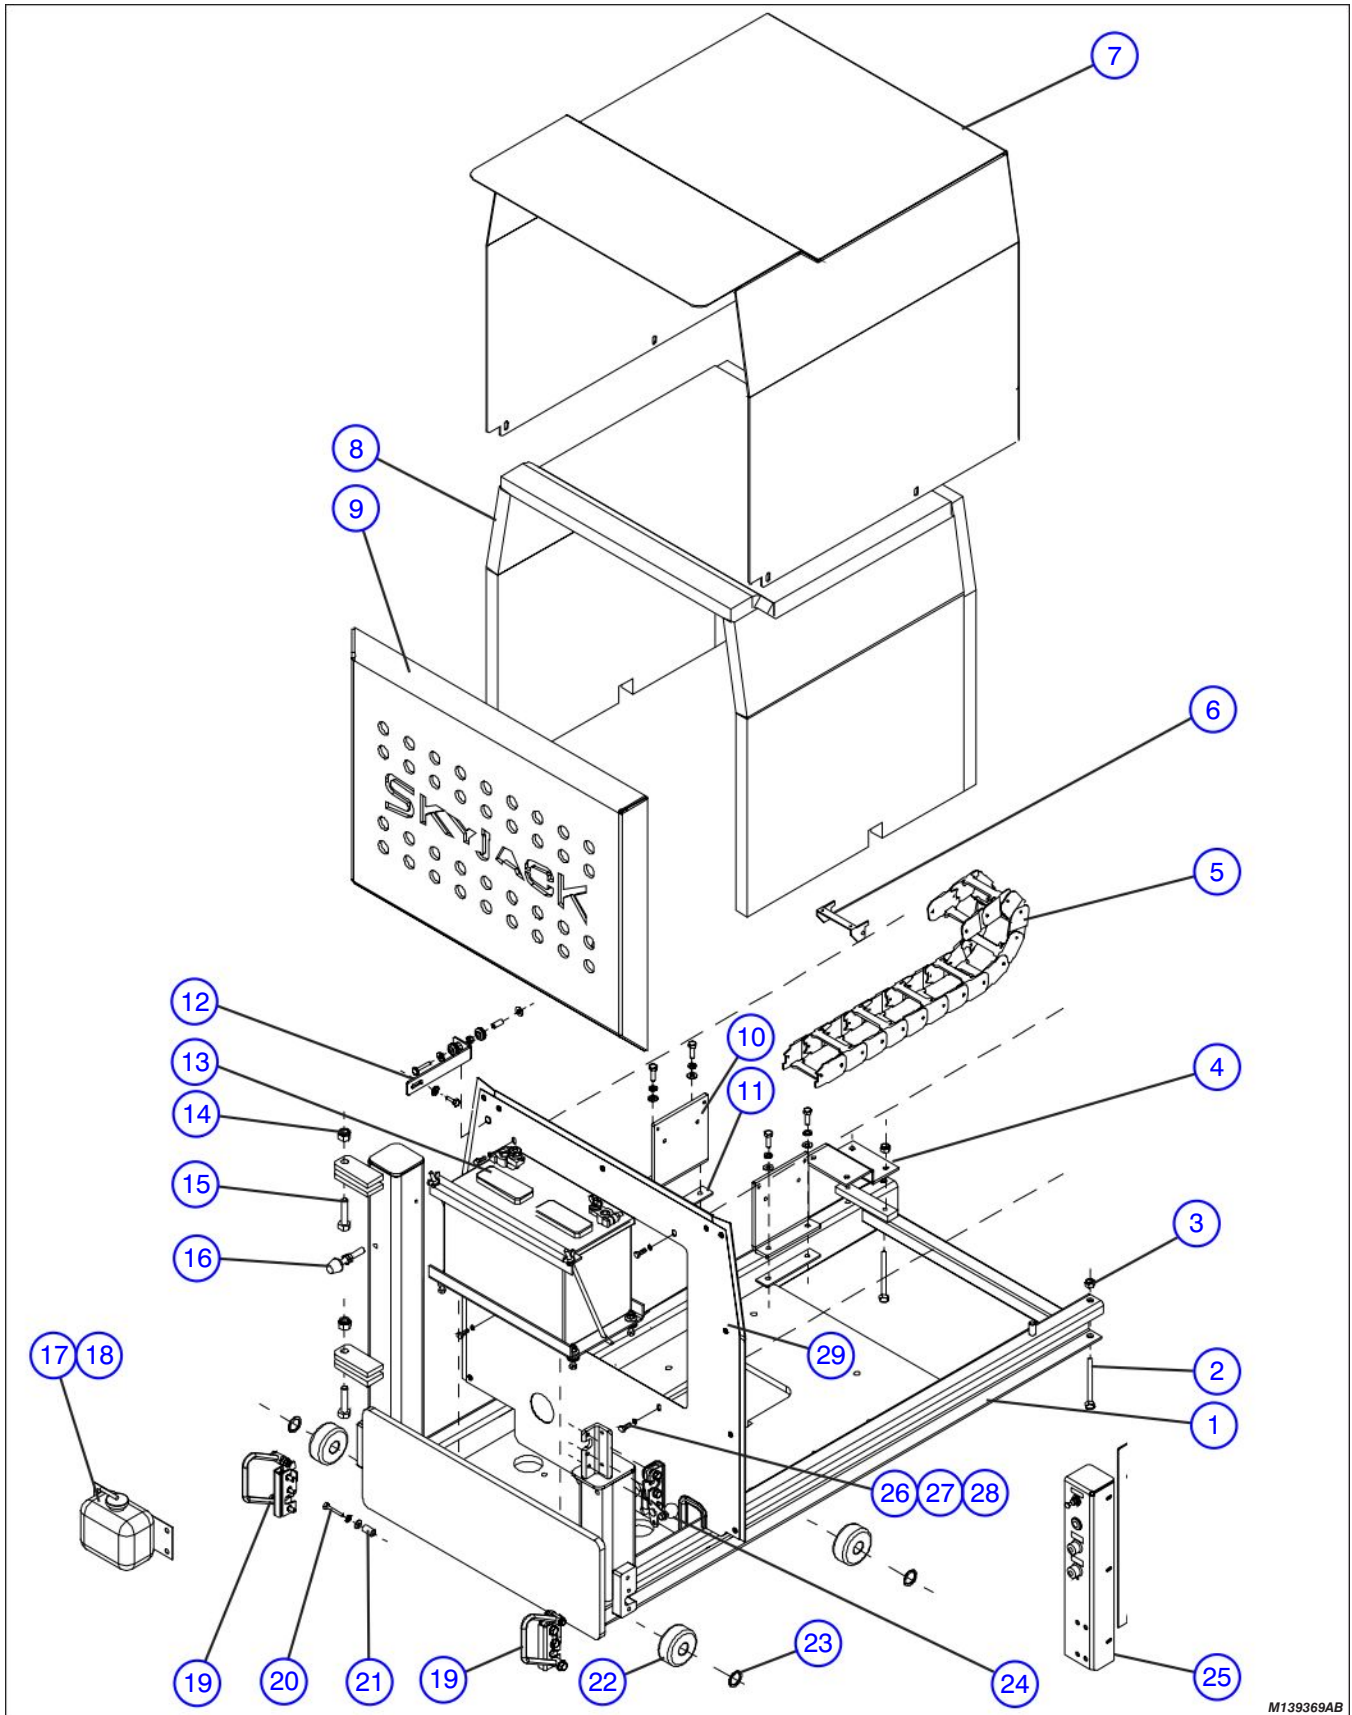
Engine Roll Out Tray & Cover Assembly (Kubota Dual Fuel / Diesel Engine)
